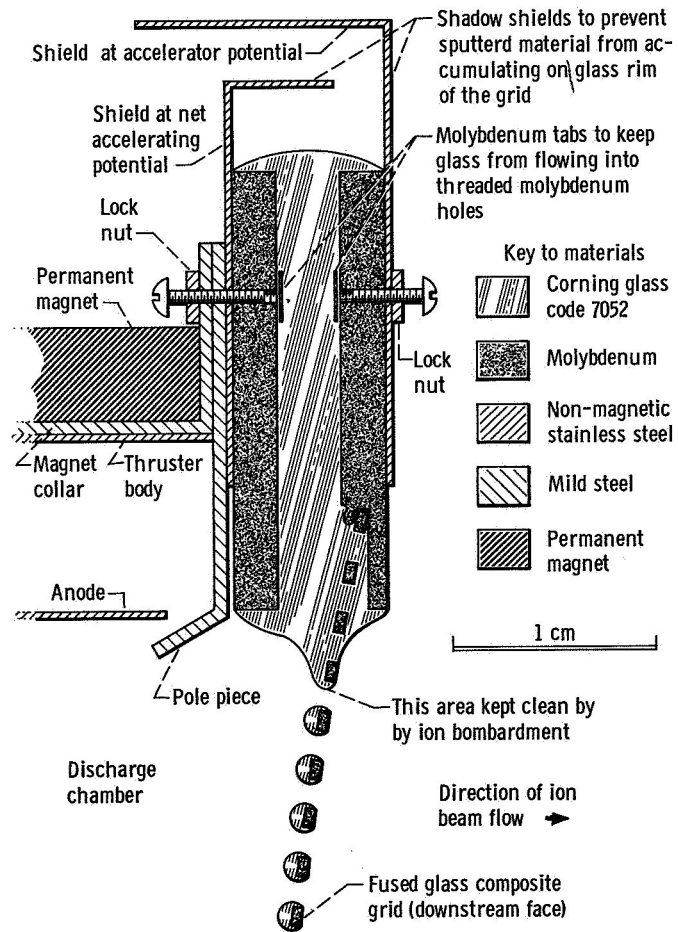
Section view of the retaining assembly of the dished grid showing thruster mounting detail.
